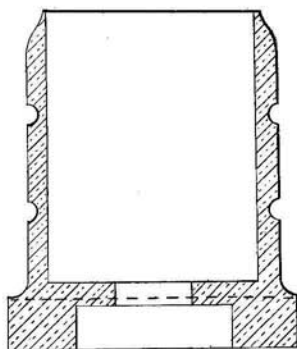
EXPLODER FOR WHITEHEAD TORPEDO. Par. 7.
